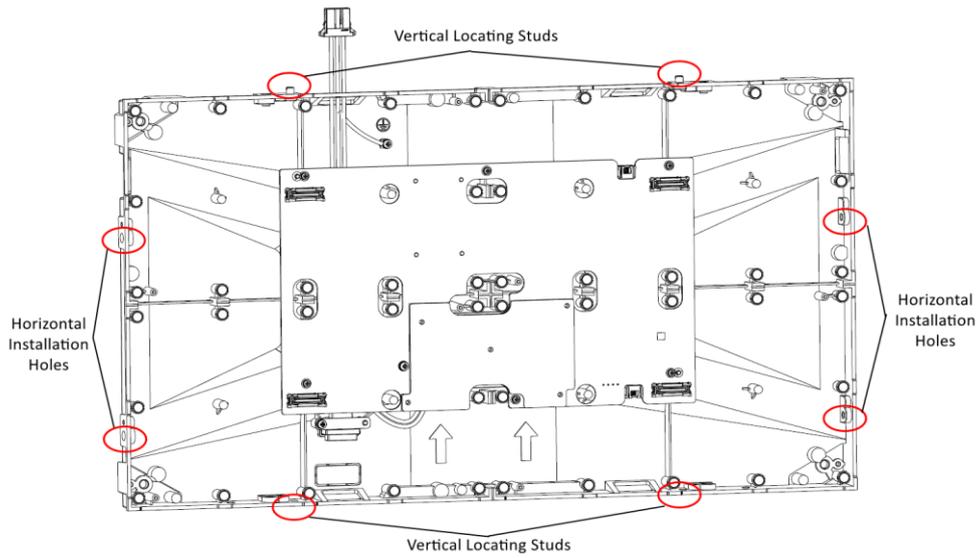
Locating Studs, Locating Holes and Installation Holes
